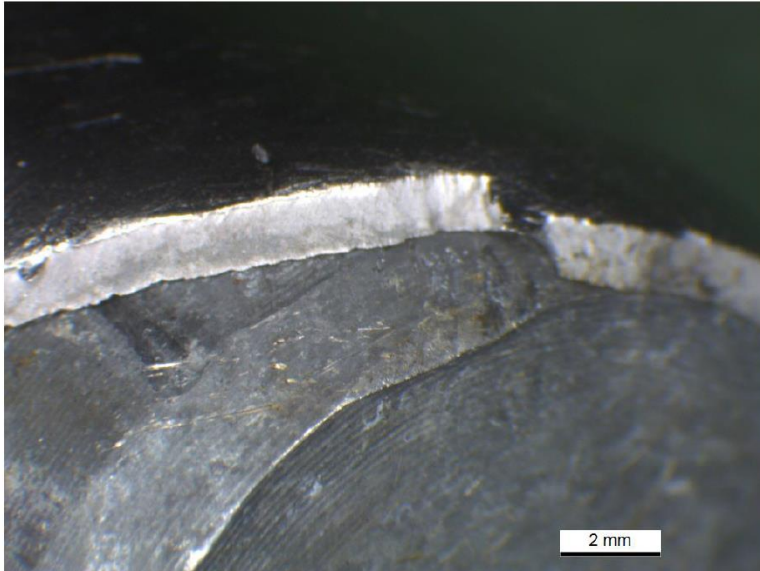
Nose wheel steering fork elliptical semi-circumferential left side fracture surface at higher magnification.
